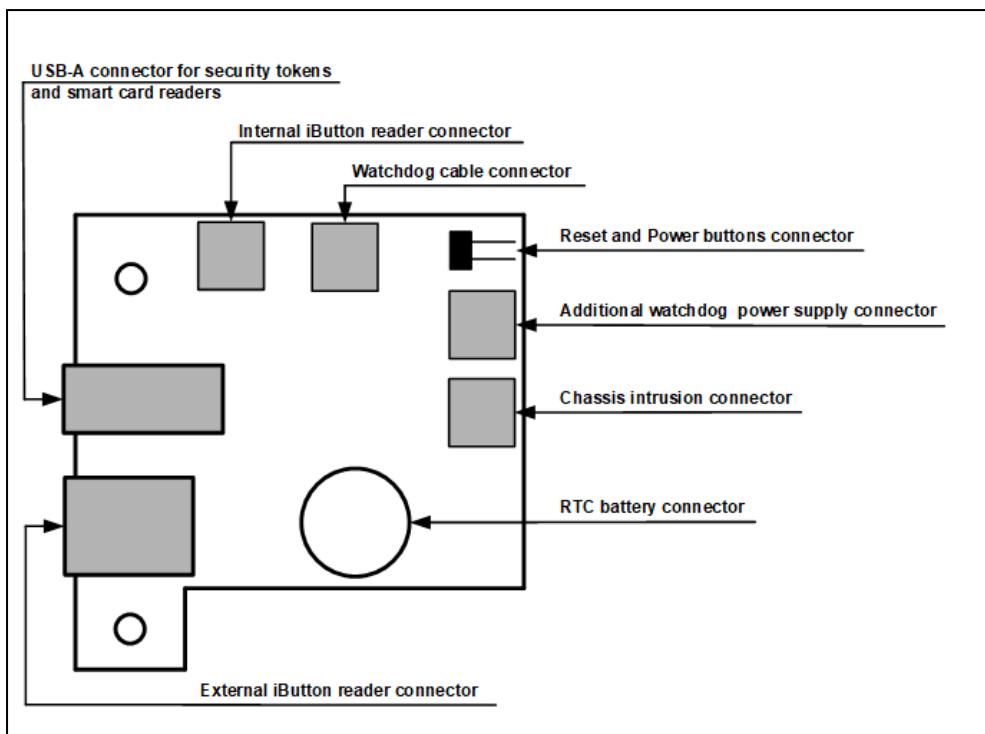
WD module – 1 for M.2 cards (types 3, 4) connector layout
